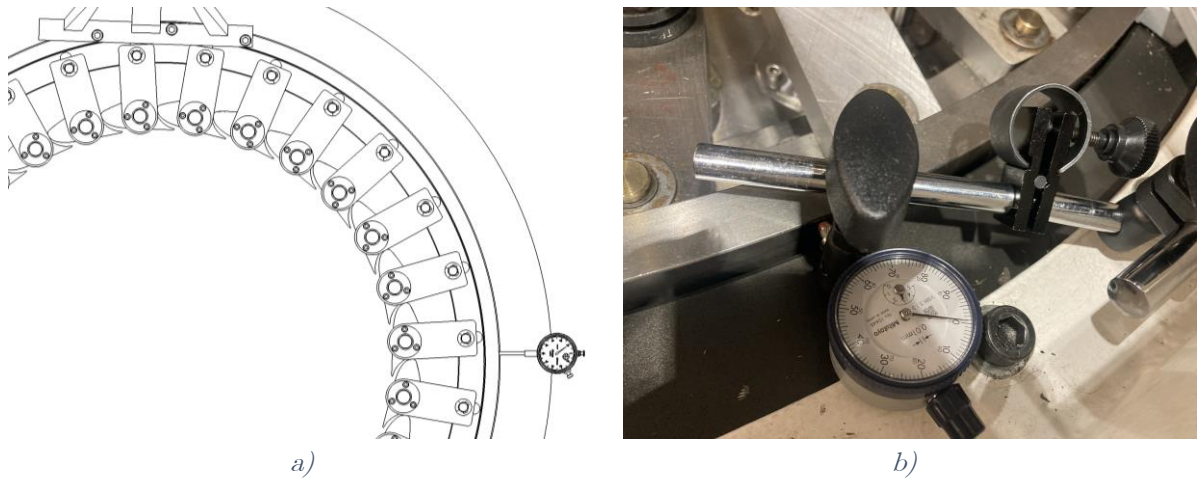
Dial gauge measurement on linear, horizontal governor ring displacement.
